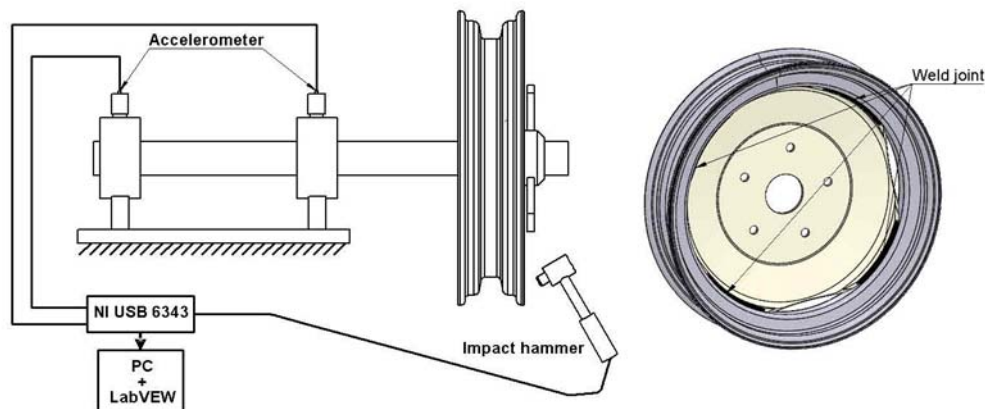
Test stand and distribution of weld joints between the disk and rim of a 12x4.25 wheel
